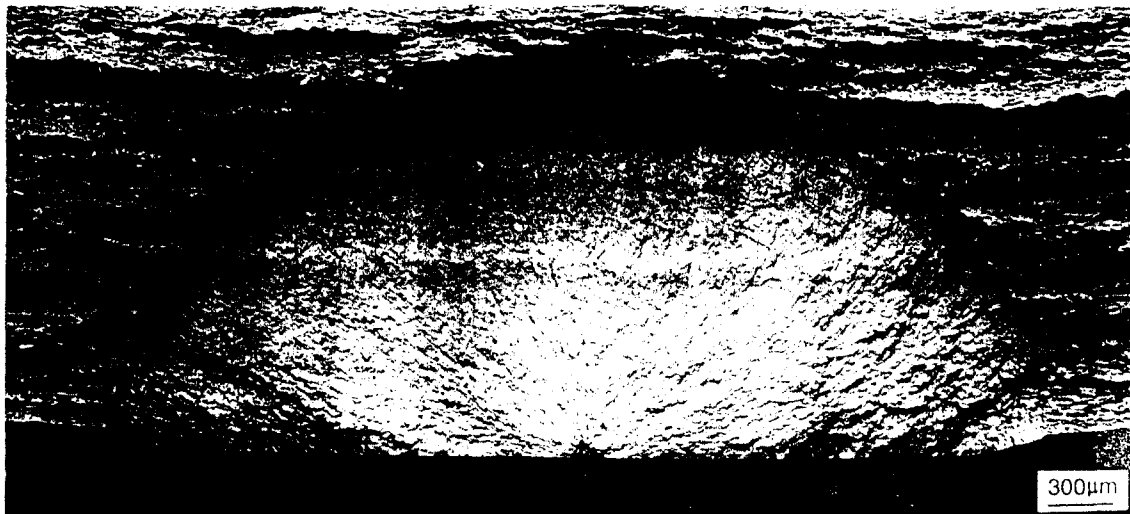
Fractography of type 304 stainless steel specimen with an artificial defect
